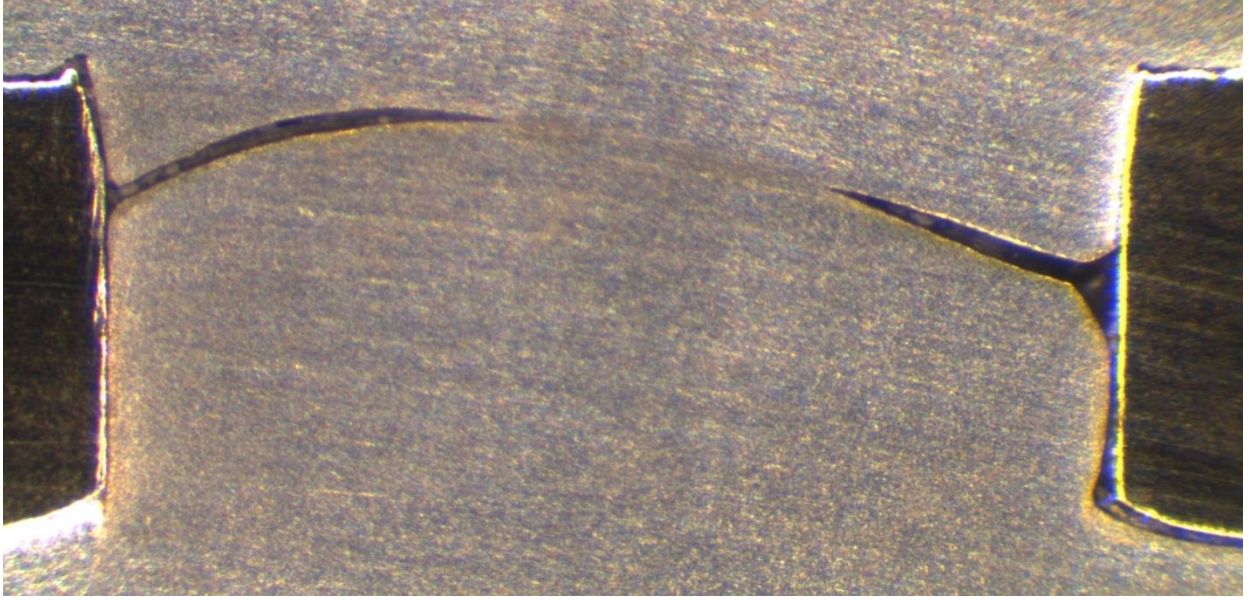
Al-Steel-Al with a through hole. 1200 rpm, 1 sec, 8000 N control force. The extruded material from the top and bottom sheet has not completely filled the volume of the through hole. A weld joint was formed within the through hole however.
